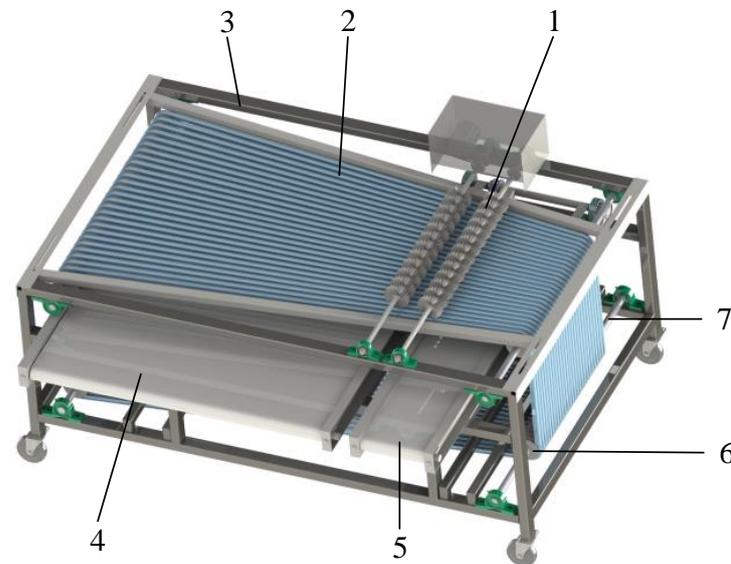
Structure of variable gap-type fresh goji berry grading machine. 1. Directional brush. 2. Belt. 3. Frame. 4. Belt conveyor for large fruit discharge. 5. Belt conveyor for small fruit discharge. 6. Belt pulley. 7. Drive shaft.
